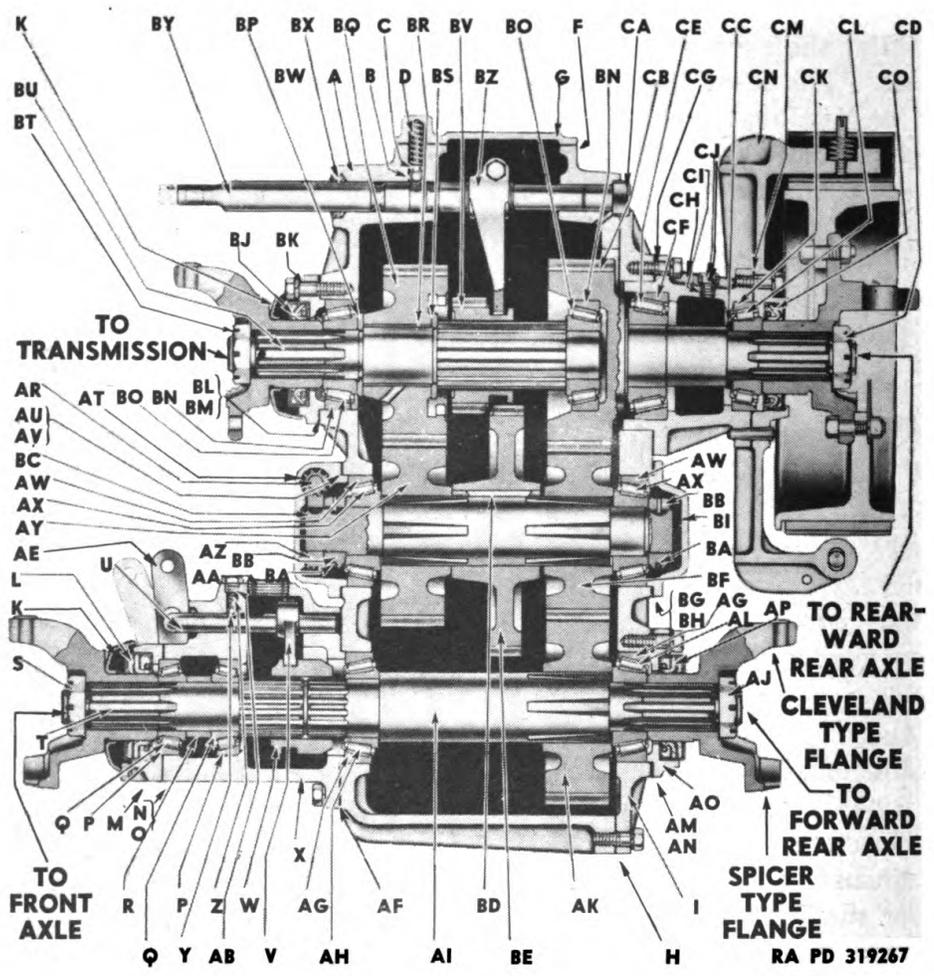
Transfer Case (6x6 Model) — Sectional View
